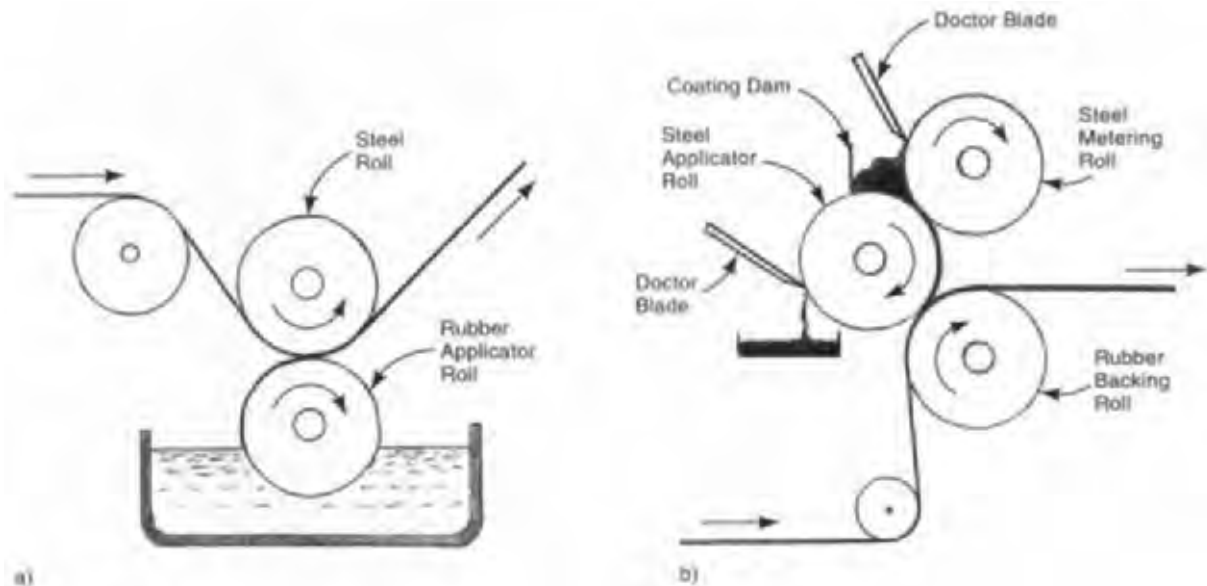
K1b Two roll-coating methods: a) Direct roll coating, used only when the coating material is of low viscosity. The coating liquid is picked up by the rubber applicator roll and is transferred to the web. b) Three-roll nip reverse coating. The metering roll rotates slowly in the opposite direction from that of the applicator roll. The nip between them governs the amount of coating on the applicator roll. The applicator roll rotates in the opposite direction from the web travel and the coating is wiped from the applicator roll and deposited on the web. Coating thickness can be controlled by varying the nip and relative speed of the web and the applicator roll. Coatings having a wide range of viscosities can be deposited with this method.
